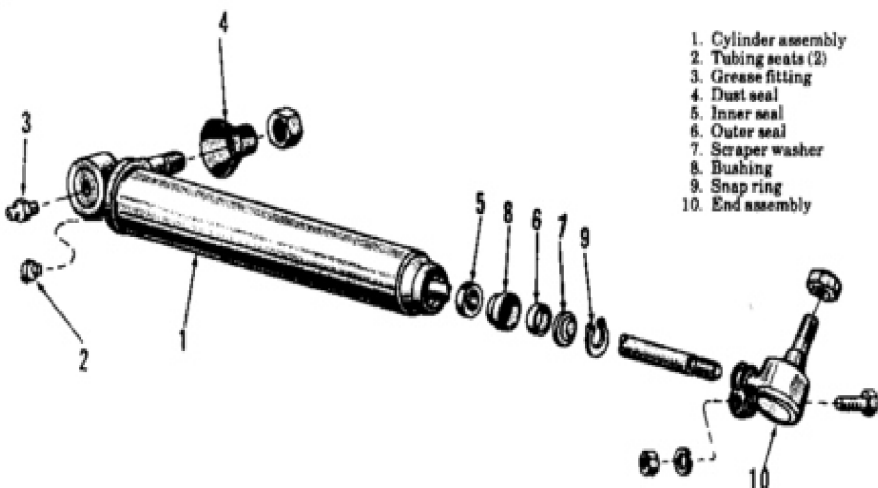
Exploded view of power steering cylinder used on 2100, 2110, 3100 and 4110 models. Piston rod seals can be renewed but cylinder, piston and piston rod are not serviced except as a complete cylinder assembly.
